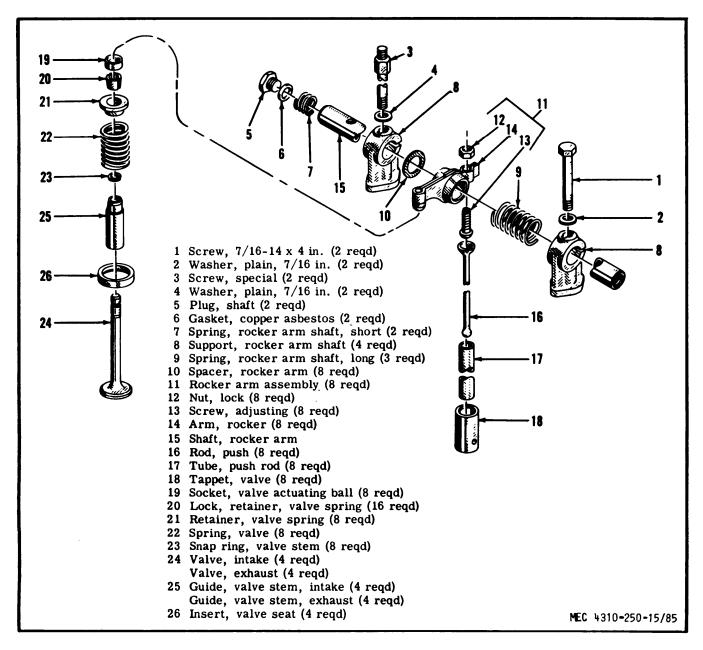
Rocker Arms, Push Rods, and Valves, Disassembly and Reassembly.
